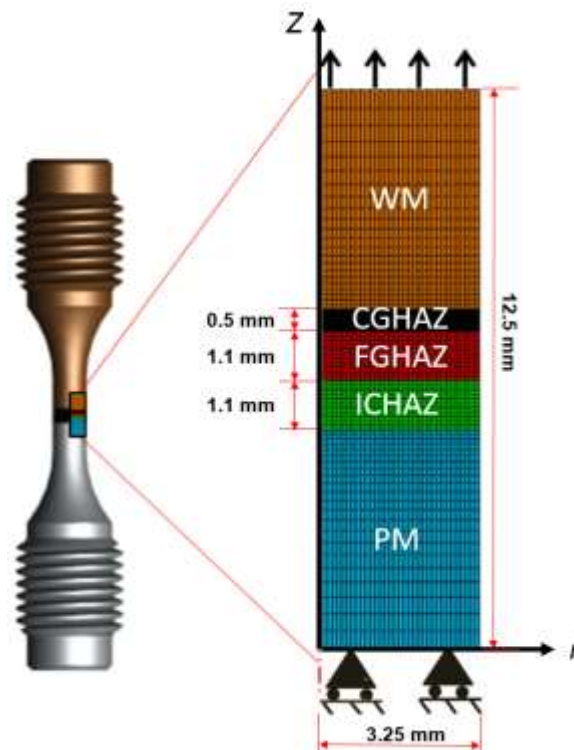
Schematic of P91 cross-weld specimen.
